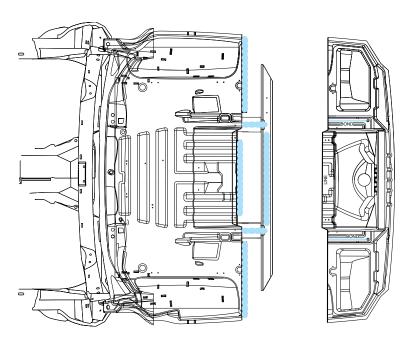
Install Sectioned Panel to Backing Plates Created From Undamaged SMC
